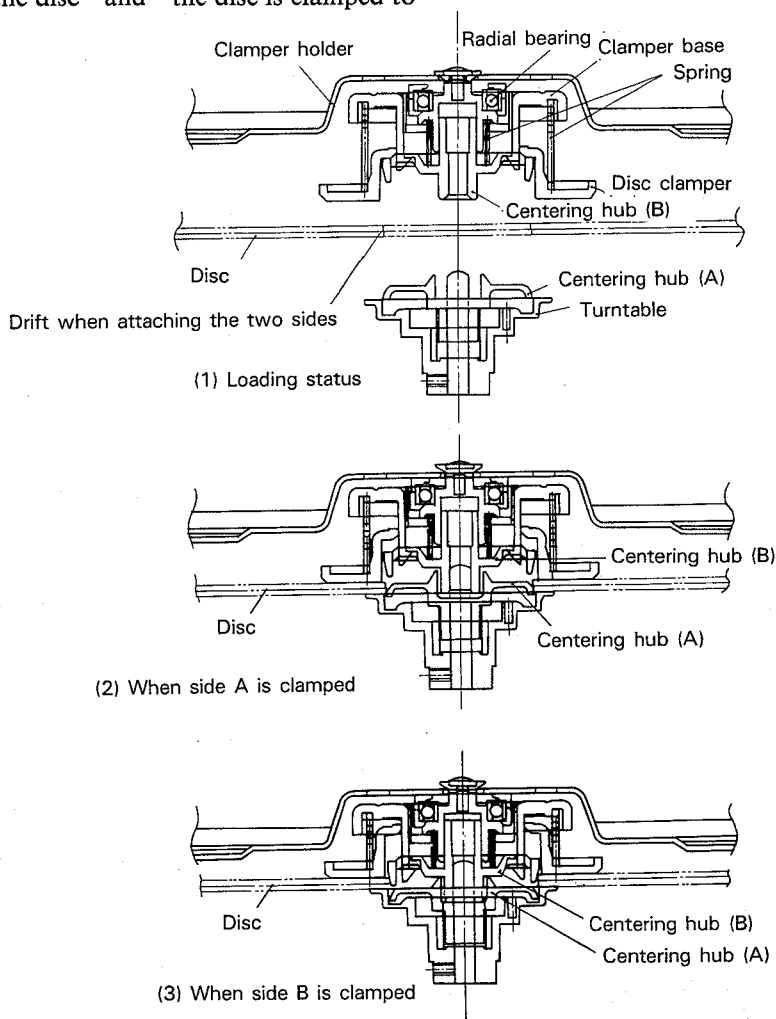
Disc clamping mechanism with side A/B independent centering system
